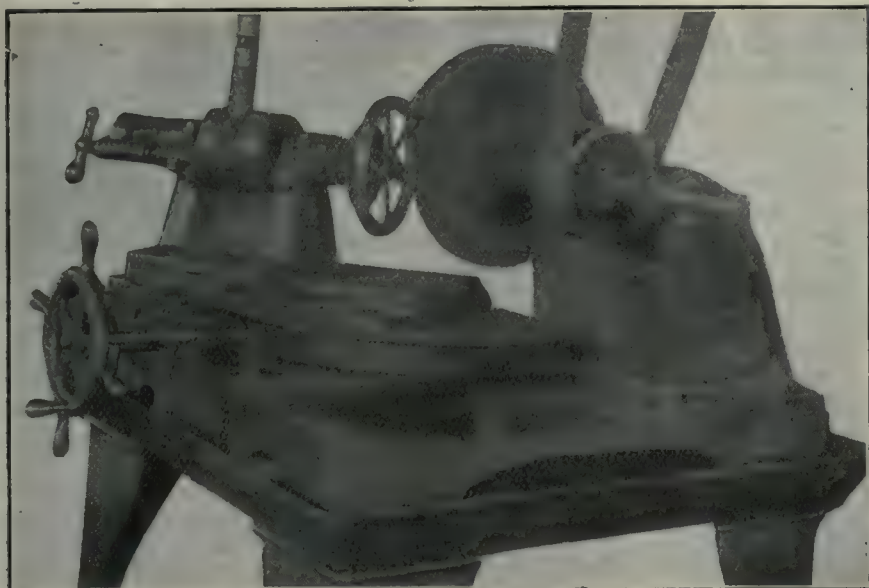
A SPECIAL HAND WHEEL GRINDER.
